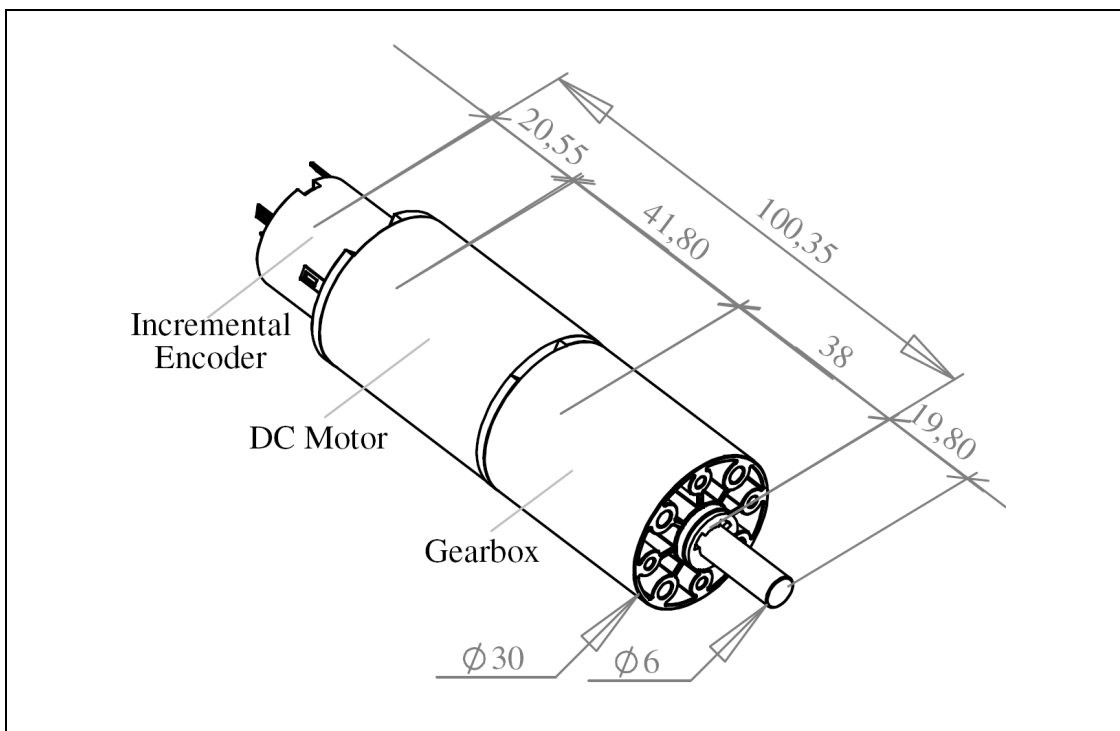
Drive Motor with Incremental Encoder and Gearbox
